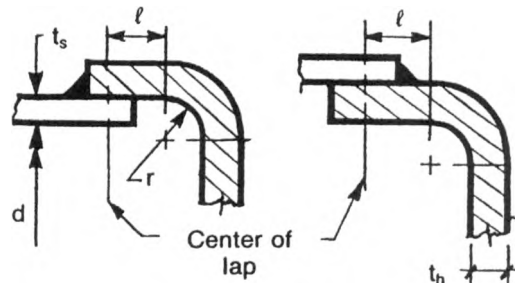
Case 5: Lap welded head [1, Figure UG-34(c)].
